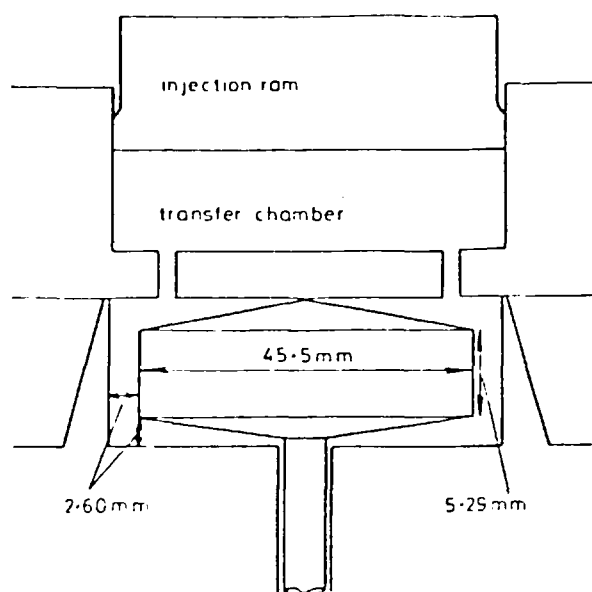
Layout of transfer chamber, rotor and test cavity
